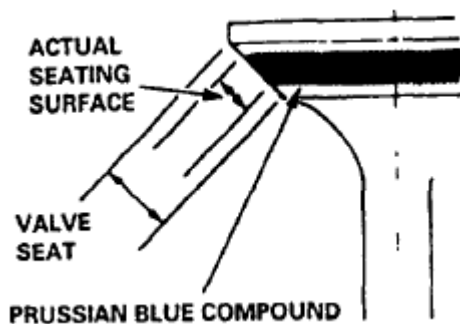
Identifying Actual Seating Surface And Valve Seat
